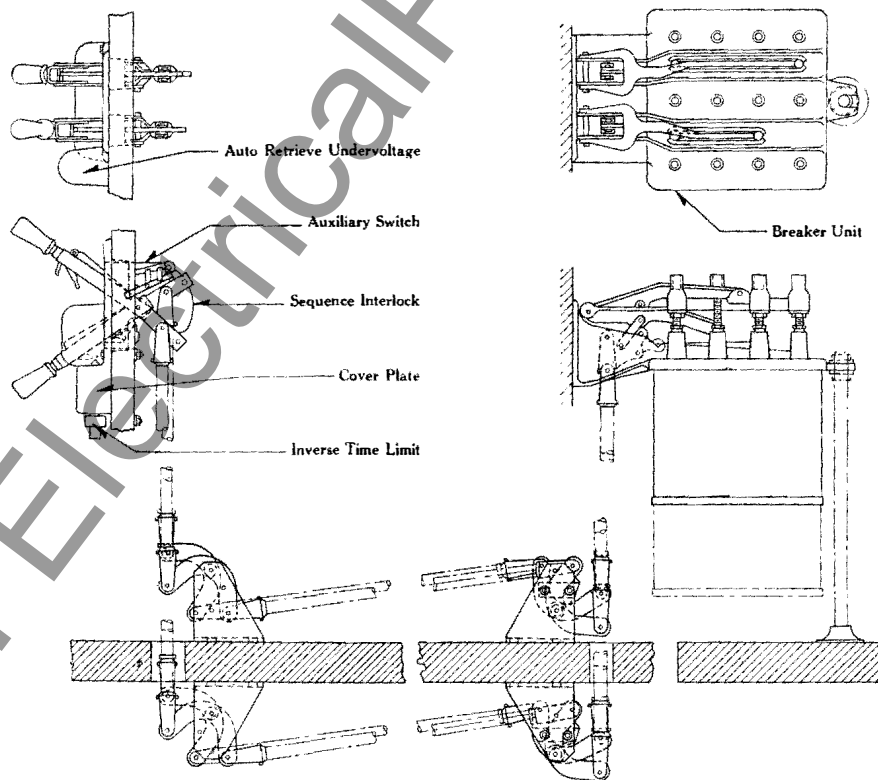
200 AMPERE CIRCUIT-BREAKER, REMOTE CONTROL
